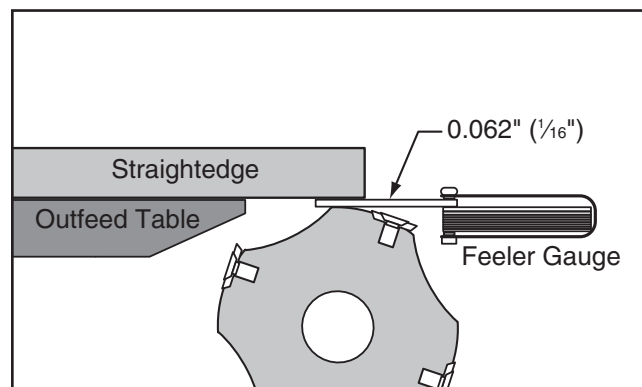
Using feeler gauge to check outfeed table cutterhead height.
